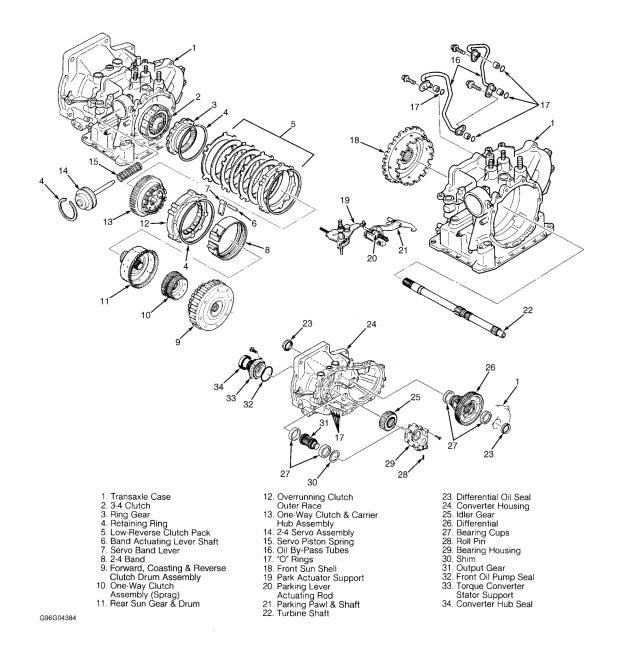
Exploded View Of F4E-III Transaxle Assembly Courtesy of FORD MOTOR CO.
